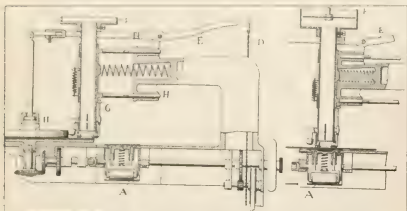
SIDE ELEVATION. FIG. 3. DETAIL OF SIDE ELEVATION.
